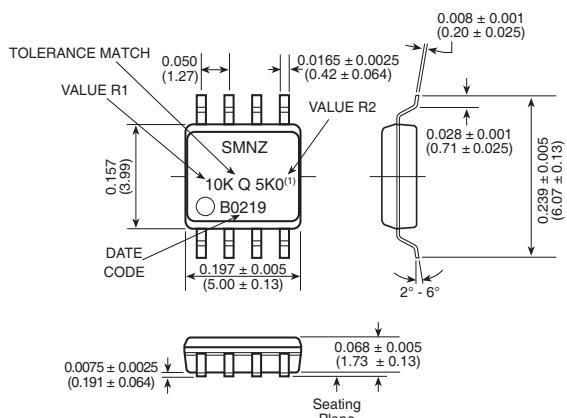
DIMENSIONS AND IMPRINTING EXAMPLE in inches (millimeters)
